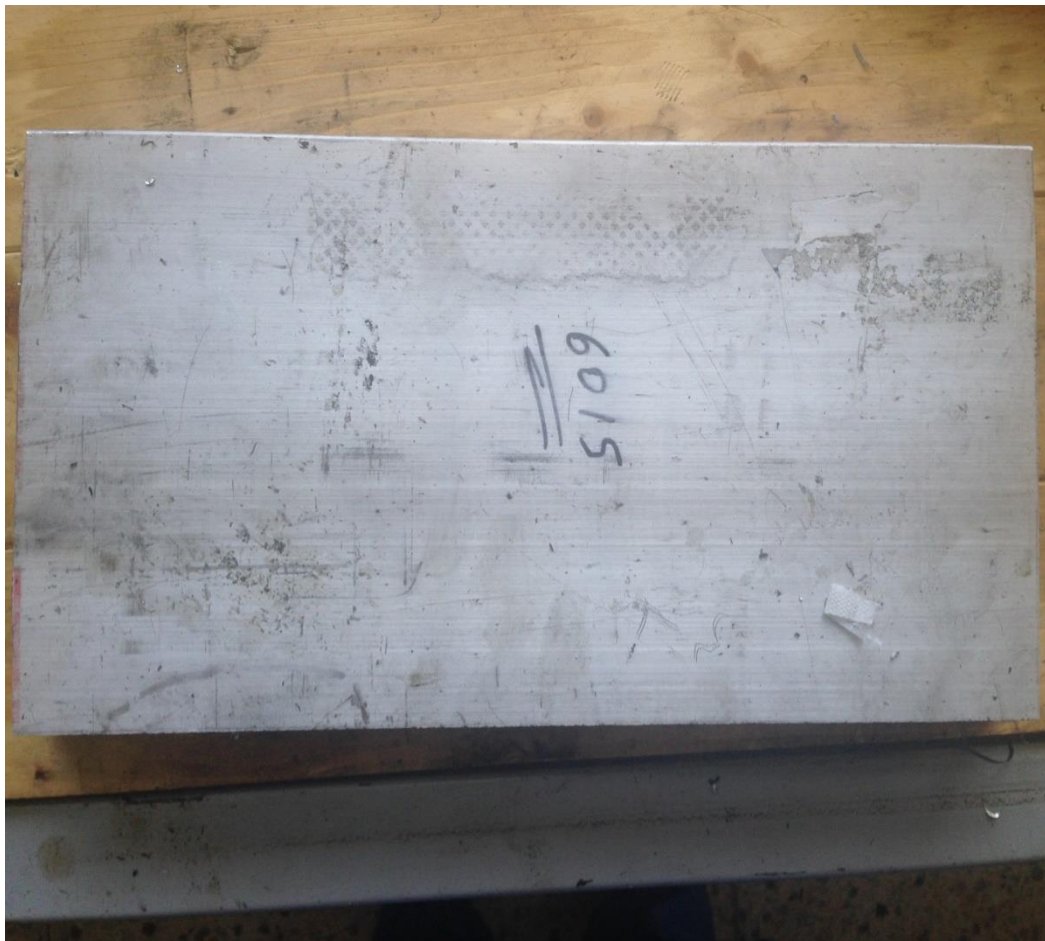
Aluminum Al 6015 workpiece used in experiments.
